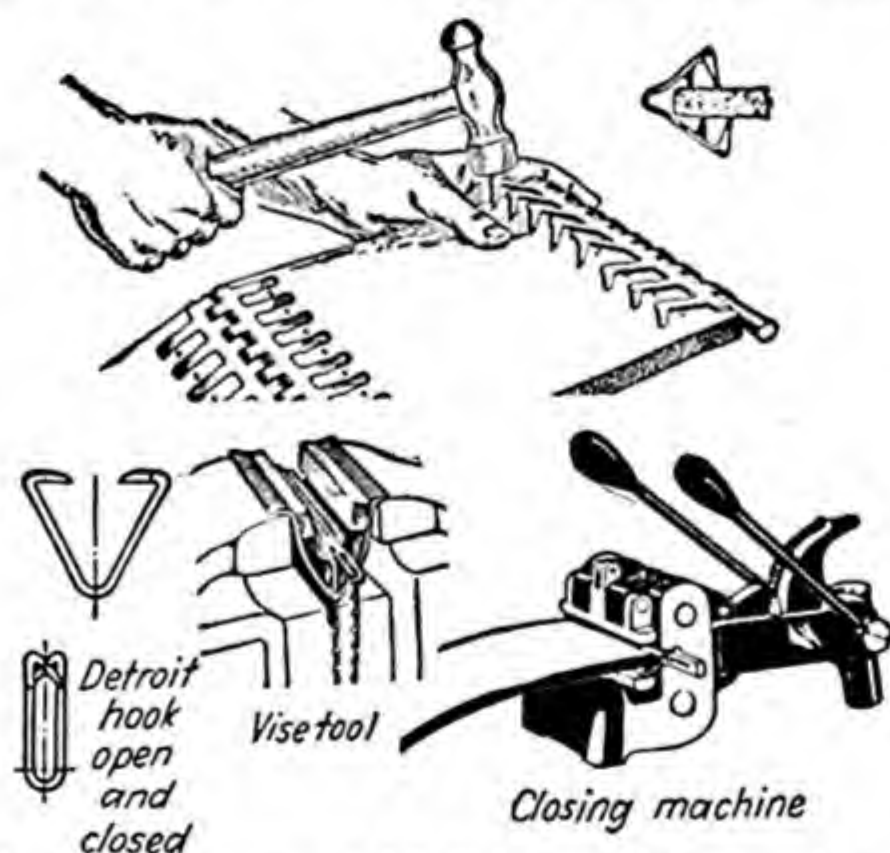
Methods of closing metal belt laces: Alligator above, Clipper below.
